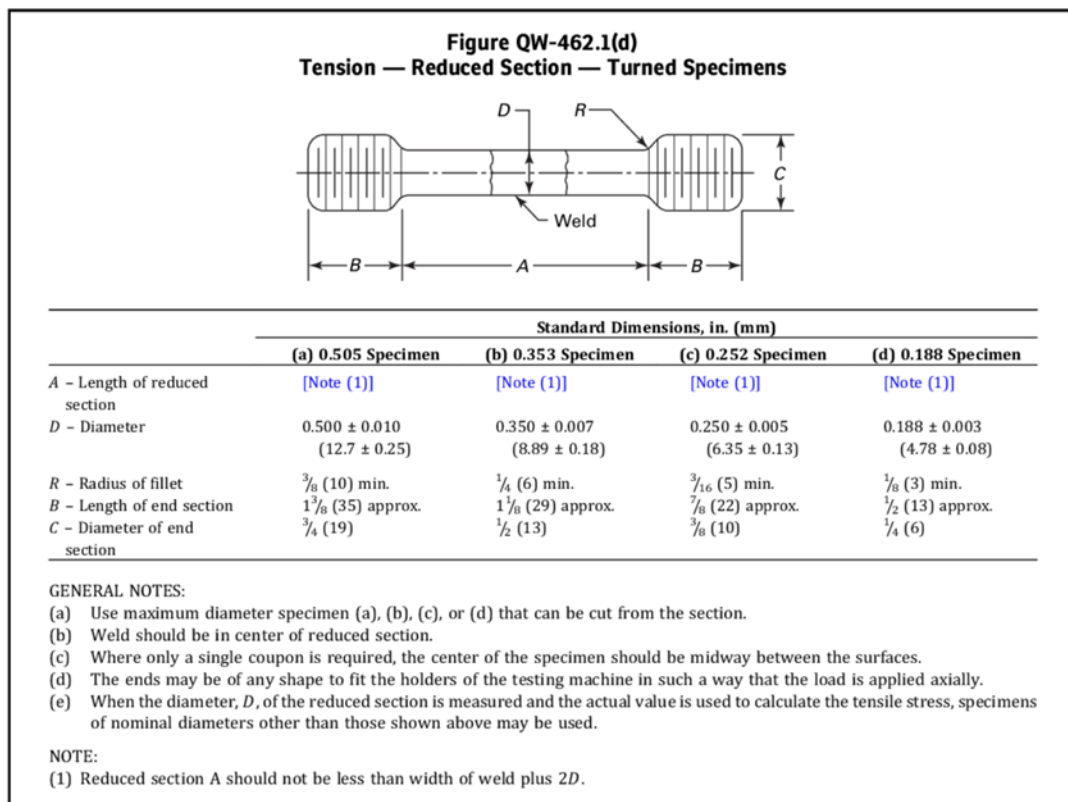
Schematic of tensile specimens fabricated from welded material.
